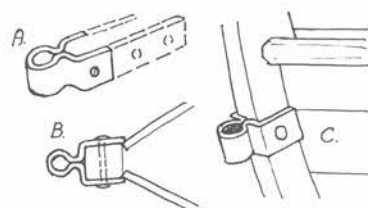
Fitting the gudgeons to the stern post. A, the gudgeon strap (Model Shipways catalog #930) is trimmed to fit; B, sectional view shows it riveted to the stern post; C, the completed assembly.
